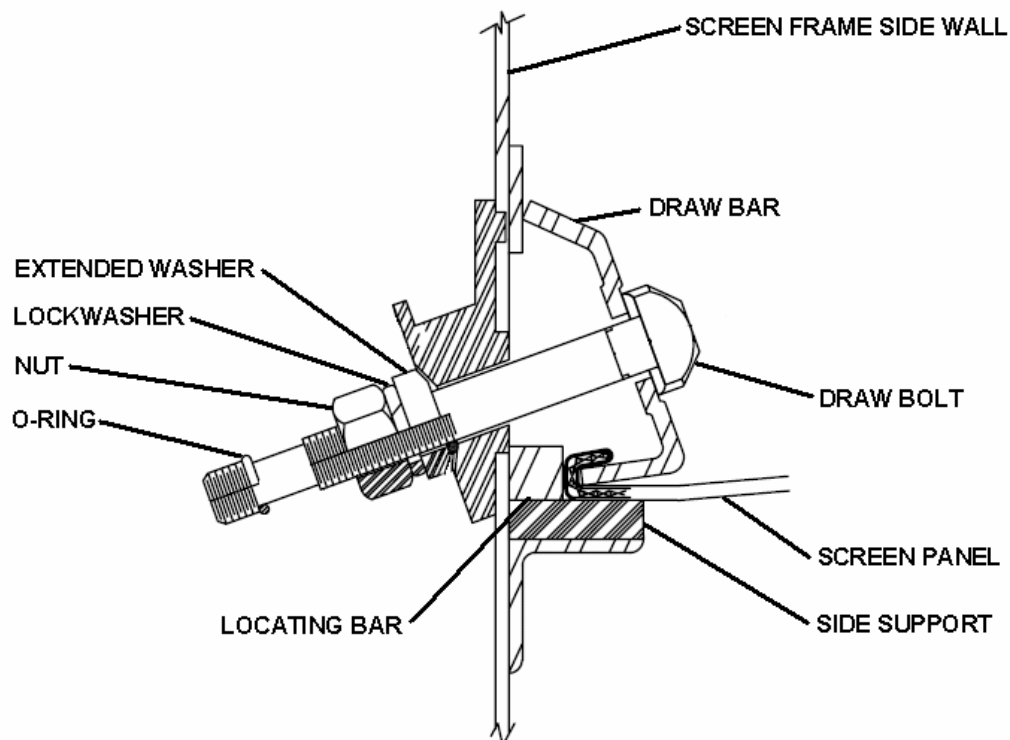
Rapid Change Draw Bolt Assembly Components
